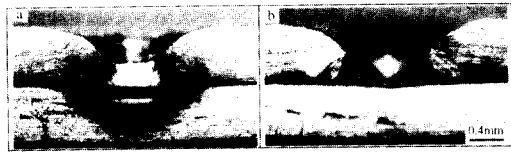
Macroscopic view of welds which were welded with acceptable condition (a) and expulsion condition (b)
